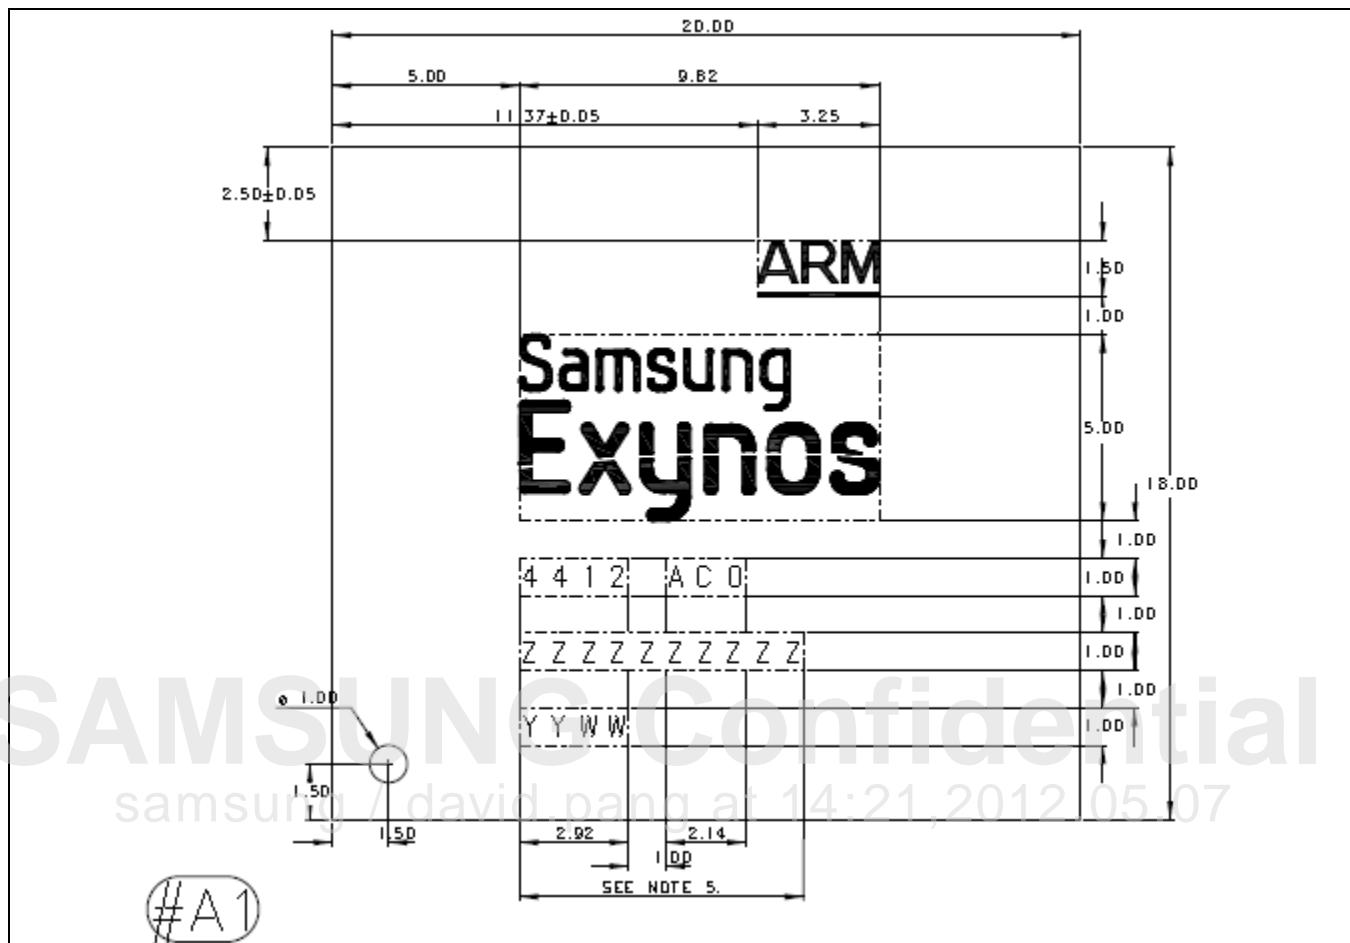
Exynos 4412 SCP Package Marking-Top View
